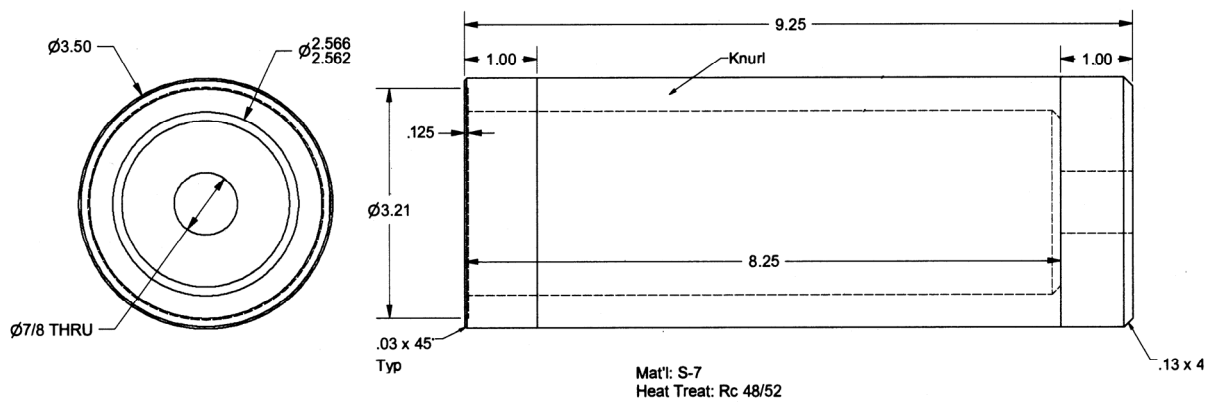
SLINGER/CARRIER DRIVER (EQ144021-01)
